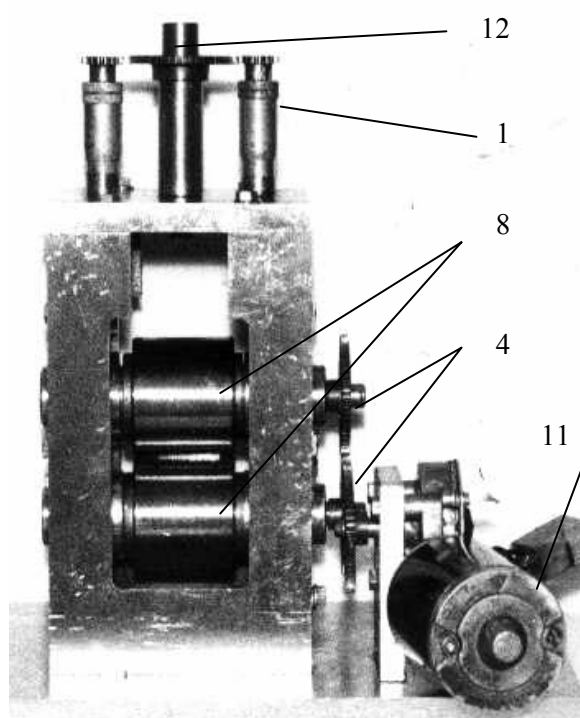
Rolling grill. 1. Adjustment micrometers for the distance among rolls; 4. Gearing for the movement transmission; 8 Rolls; 11.Engine; 12.Device for the adjustment of the distance among rolls.
